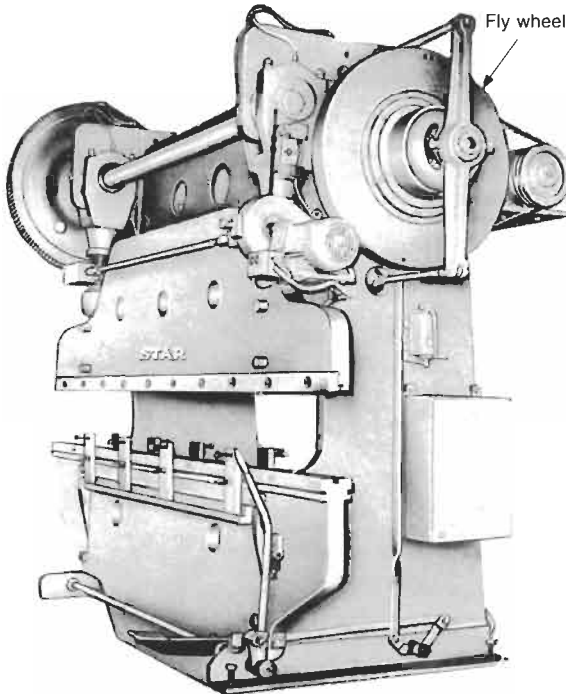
A brake press illustrating the use of a flywheel (Courtesy: Prem Engineering Works)
